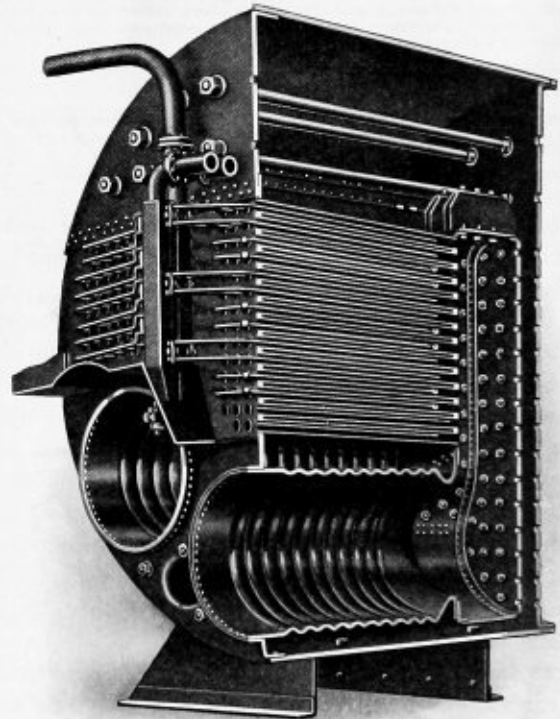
Sectional View, Showing Location of Superheater Elements in Fire Tubes
